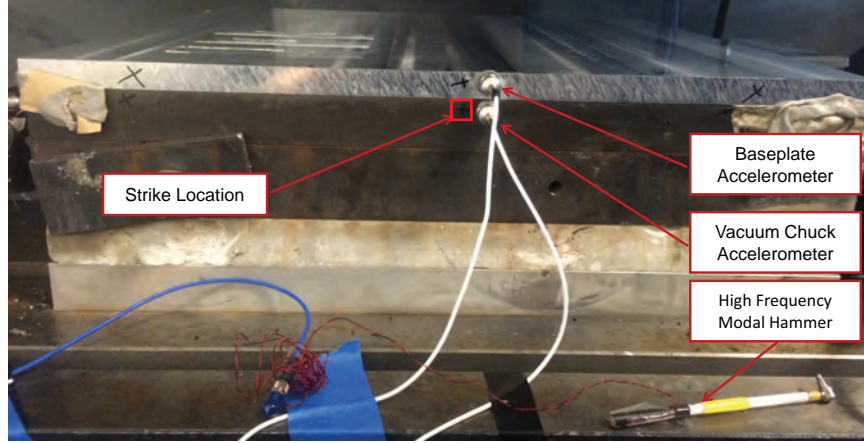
Setup for modal hammer testing of the vacuum chuck anvil structure using a 9.53 mm (0.375 in) thick Al 6061-T6 baseplate. This test is used to measure the dynamic stiffness of the structure with impacts on the vacuum chuck.
